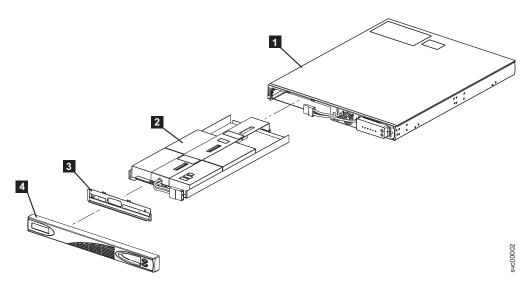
Exploded view of the 2145-1U uninterruptible power supply hardware
